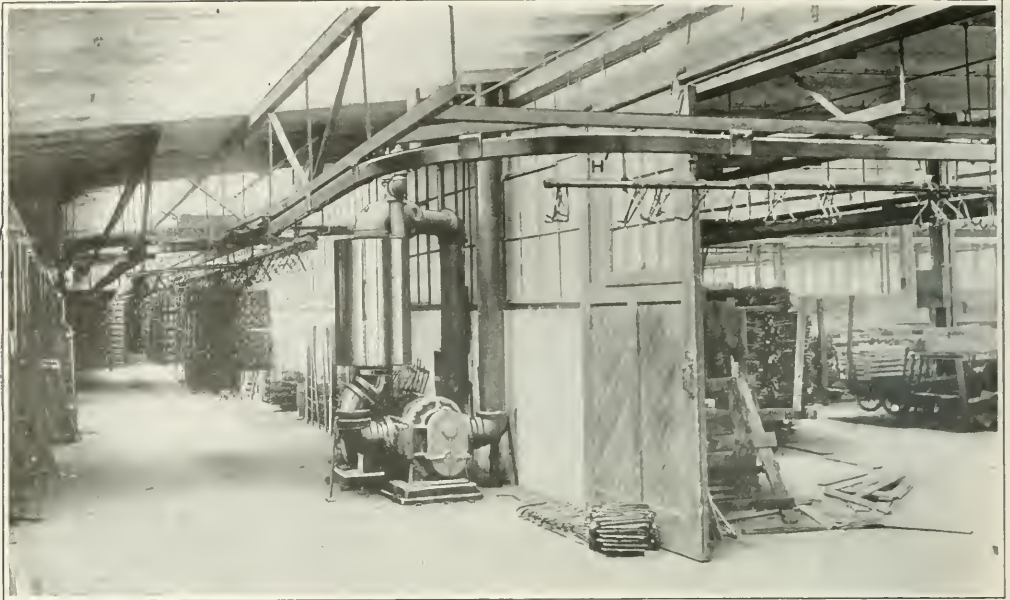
View of Shipping Room, showing Point at which Empty Carriers return to be reloaded, and Oil Burning Power Plant
